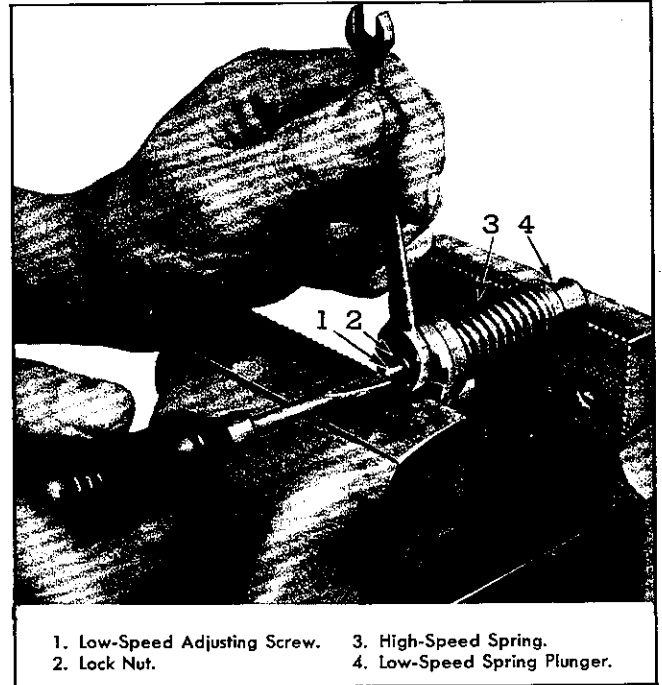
Removing Adjusting Screw from Governor Spring and Plunger Assembly.
